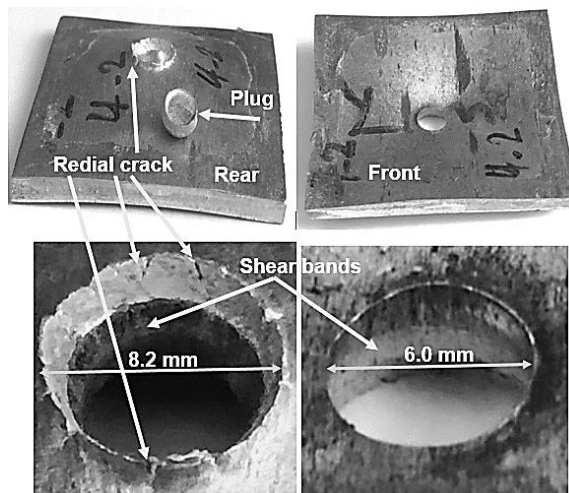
Front and rear view of the aluminum target and the enlarged view of the hole
